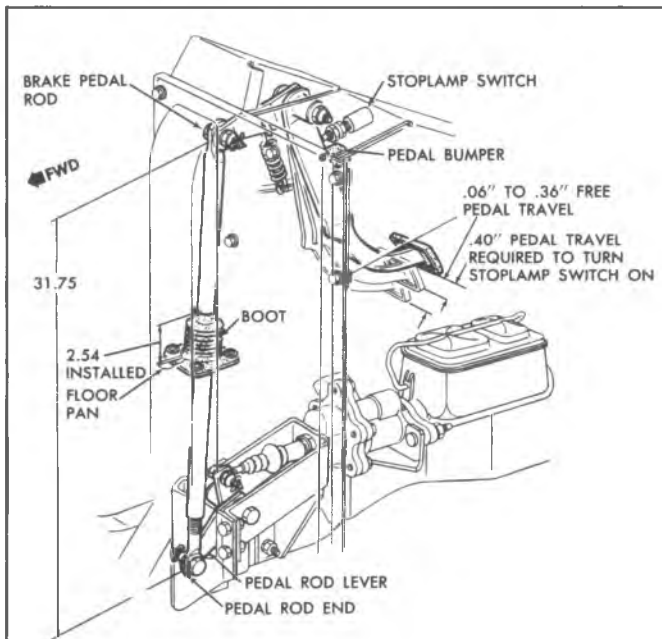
Brake Pedal and Stop Lamp Adjustment--P30(32) Model
